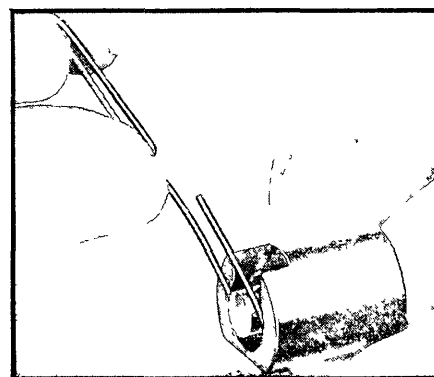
Securing dummy shaft and bushing in position with common paper clip. Chrysler disc brake
